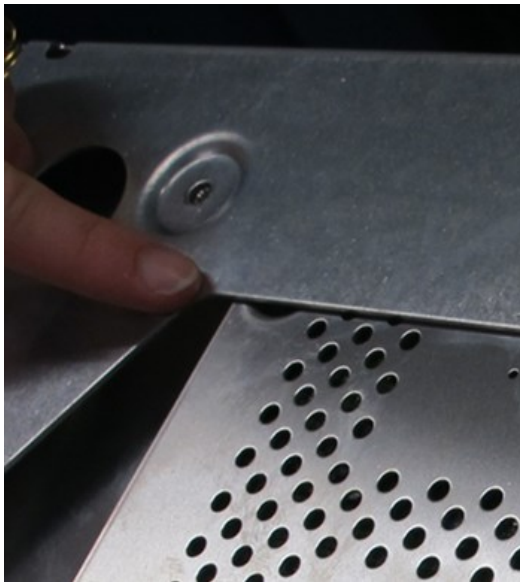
Disassembly of the television, the printed circuit board is sealed off by several metal plates hold together by screws and it is therefore both time consuming and difficult to remove them manually.
